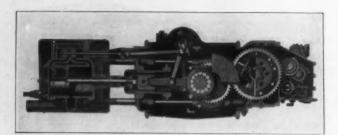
Cross Section of Doble Engine Generator gear meshes with main drive gear on rear axle
